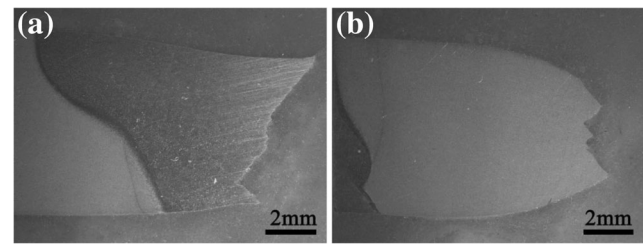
Macrosections of fracture zone: a hybrid laser-MIG welded joint and b MIG welded joint
